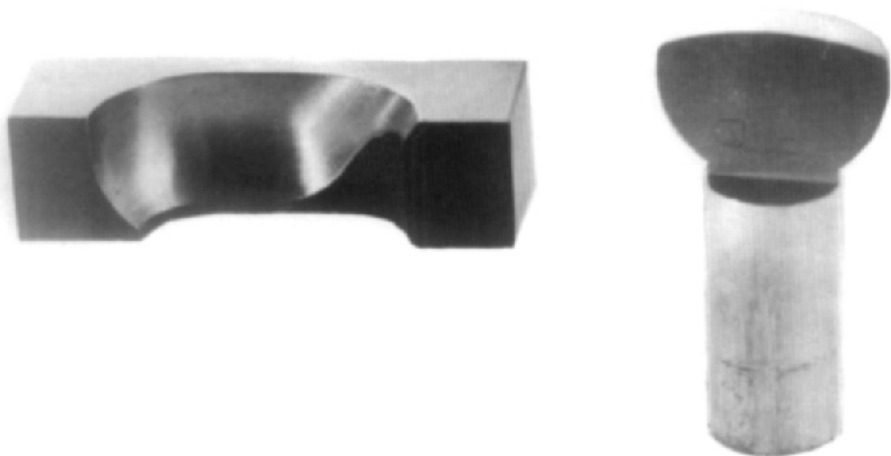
Longitudinal section through screw hole and screw head of the DCP.
